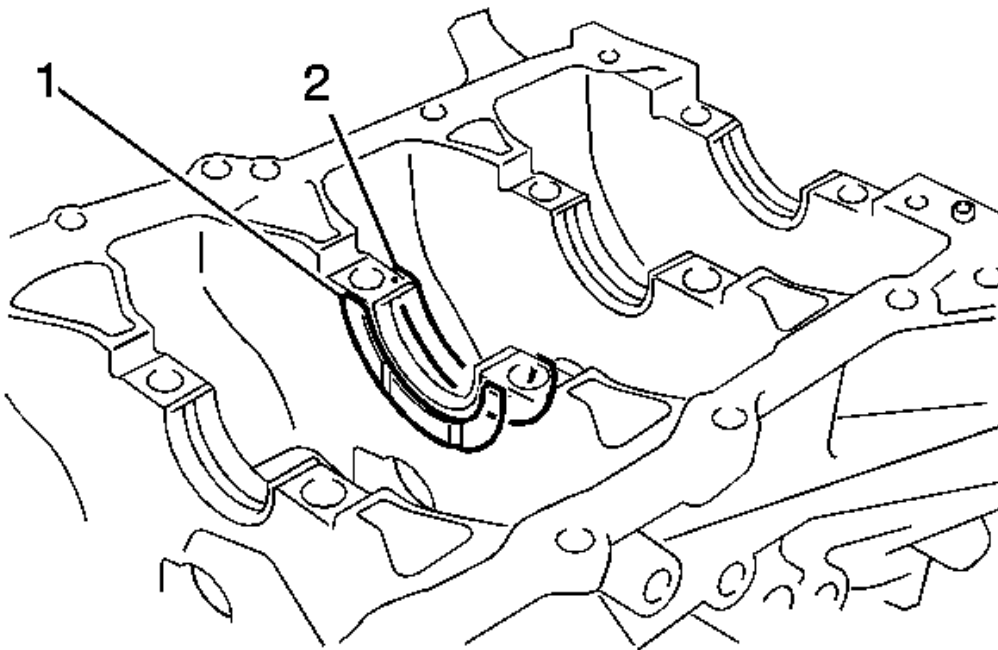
Identifying Upper Crankshaft Thrust Washers
